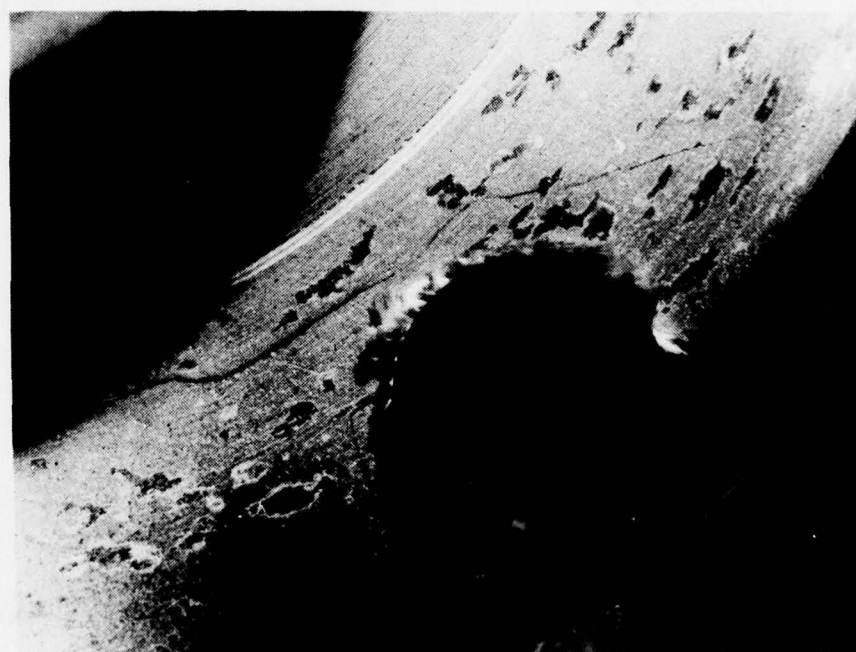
All-Ceramic Nozzle After 50 Hour Engine Run (Note fracture at bottom section of RBSi_3N_4 rear shroud) (Sheet 2 of 3)
